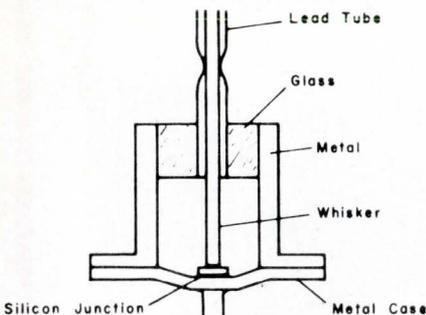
Typical "top hat" rectifier. The whisker is soldered to the junction, forming a "T" assembly. The junction is soldered to the mounting base, which is welded to the top hat assembly, the whisker extending into the tube. The final hermetic seal is made by sealing the tube to the whisker. The base metal usually does not thermally match the silicon. During thermal cycling, there is relative movement between the junction and the base which can crack or crystallize the solder. The inert atmosphere again limits the voltage gradient because of corona possibilities.
